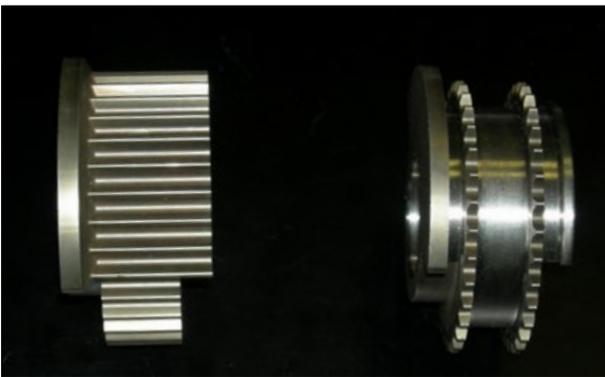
Automotive VVT sprocket. Original component was made from two parts joined together. SAM enables the final component to be made from a single sinter furnace hardened component
